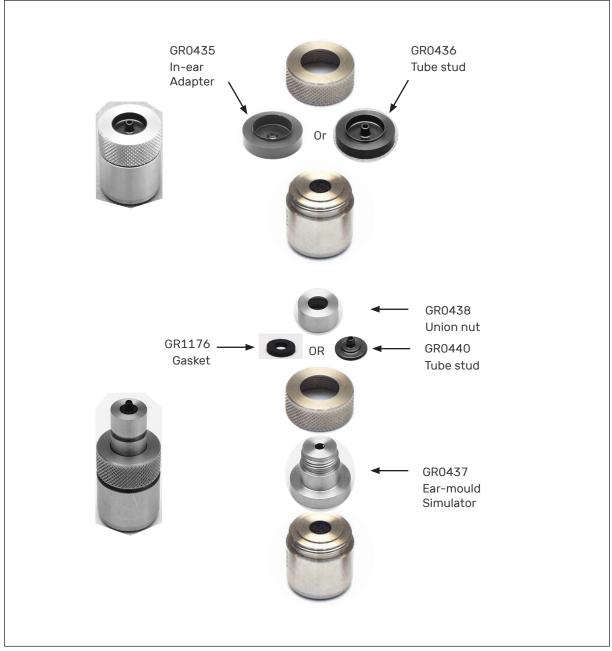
Assembled and exploded views of the ear simulator itemizing user-serviceable accessories for testing earphones either coupled to the ear via tube inserts or placed in the ear
